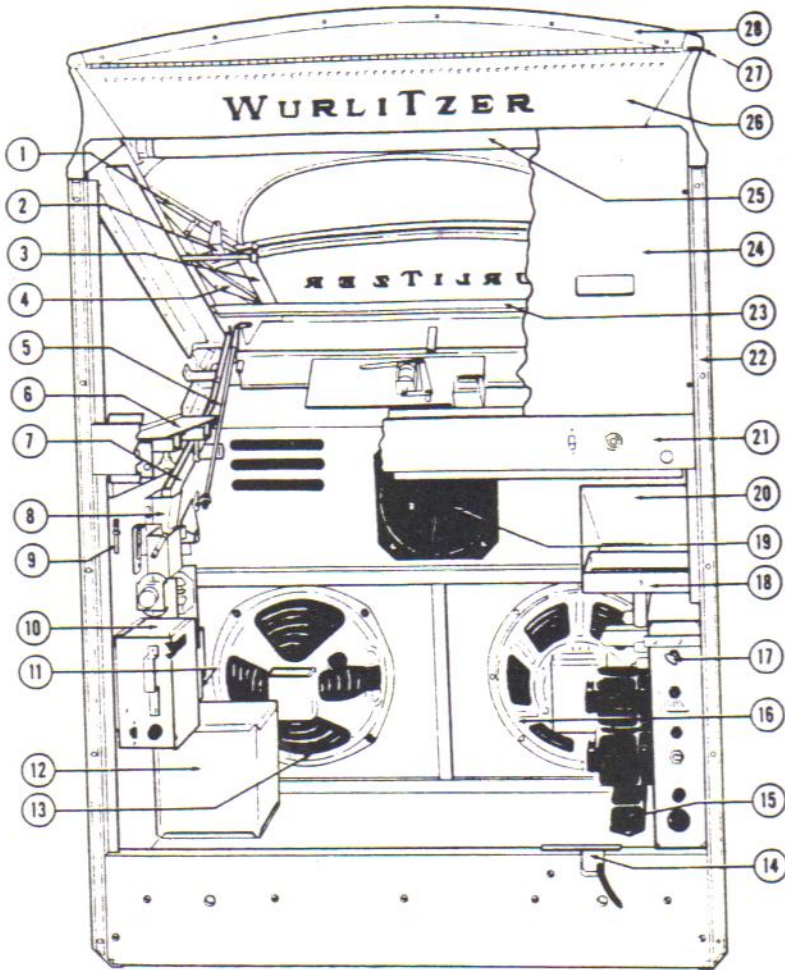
TRIM AND MOUNTING - BACK VIEW - 2500
